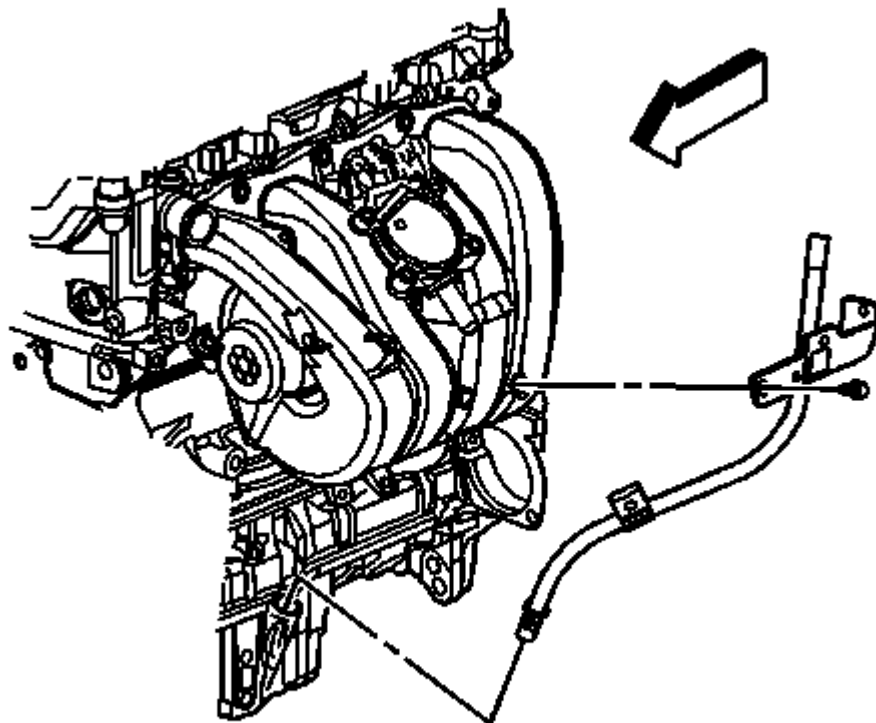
View Of Oil Level Indicator Tube & Bolt
